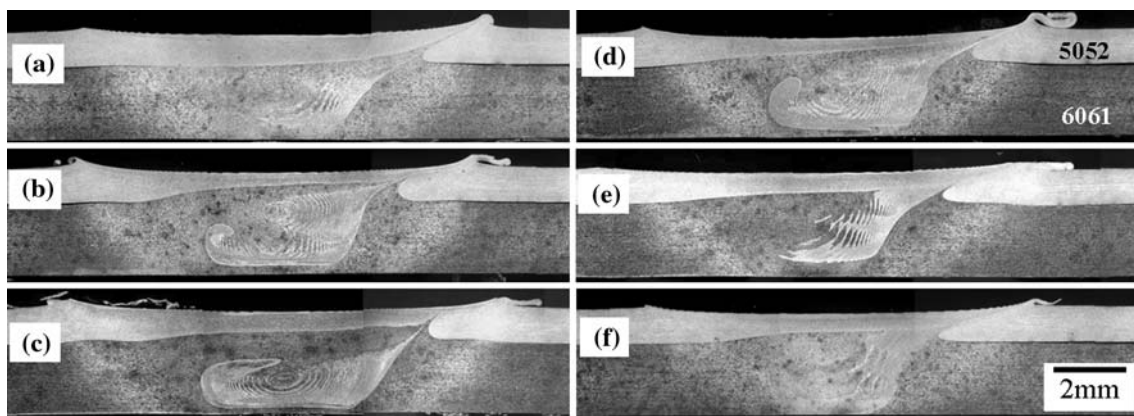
Optical macroimages of lap-jointed 6061 and 5052 in case B with various welding conditions: (a) 1250 rpm, (b) 2,500 rpm, and (c) 3600 rpm at fixed 267 mm/min, while (d) 127 mm/min, (e) 267 mm/min, and (f) 507 mm/min at fixed 1,600 rpm
